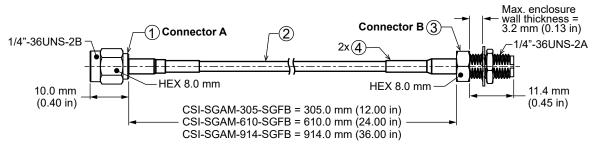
Product Dimensions for the CSE-SGAM-ccc-SGFB Cable Assembly
